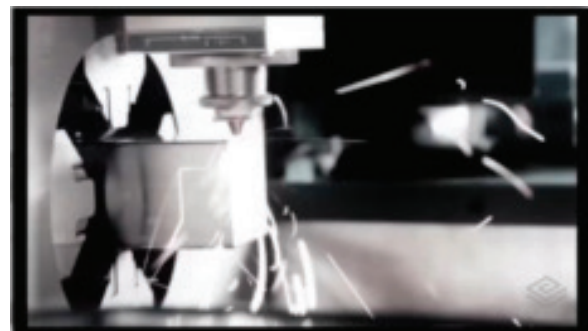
CNC automated Laser-cutting of chassis tubulars
